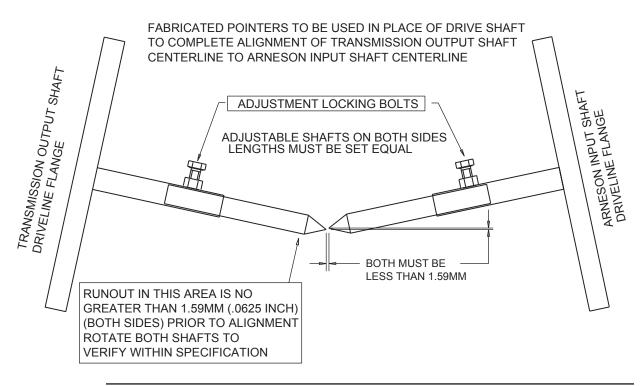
Remote or Island Mounted Alignment Tool, Shafts not Parallel
